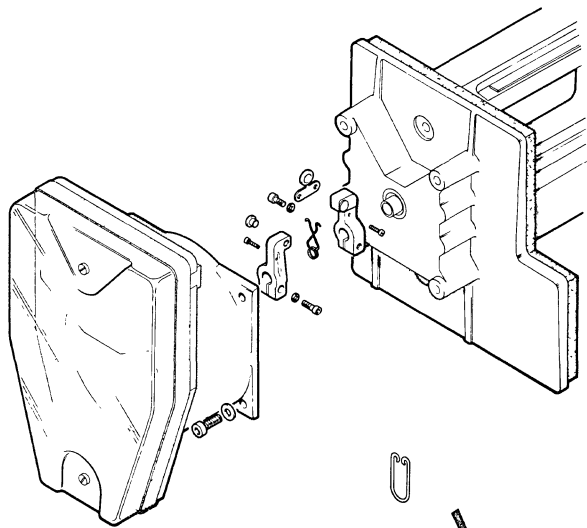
ACTUATOR ASSEMBLY (PART 1 OF 4)
